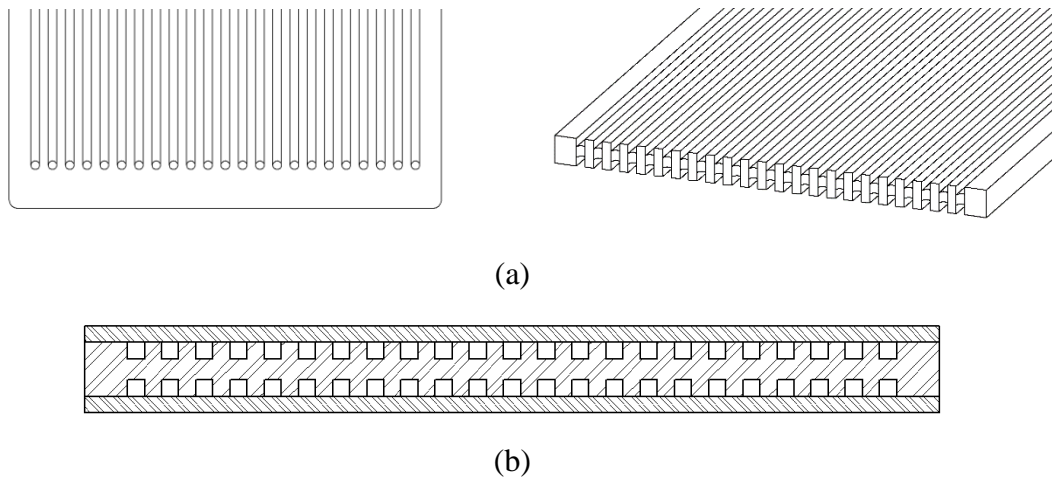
(a) 2 mm connecting holes between the two layers, (b) cross-sectional view of Oscillating Heat Pipe with the brazed plates.
